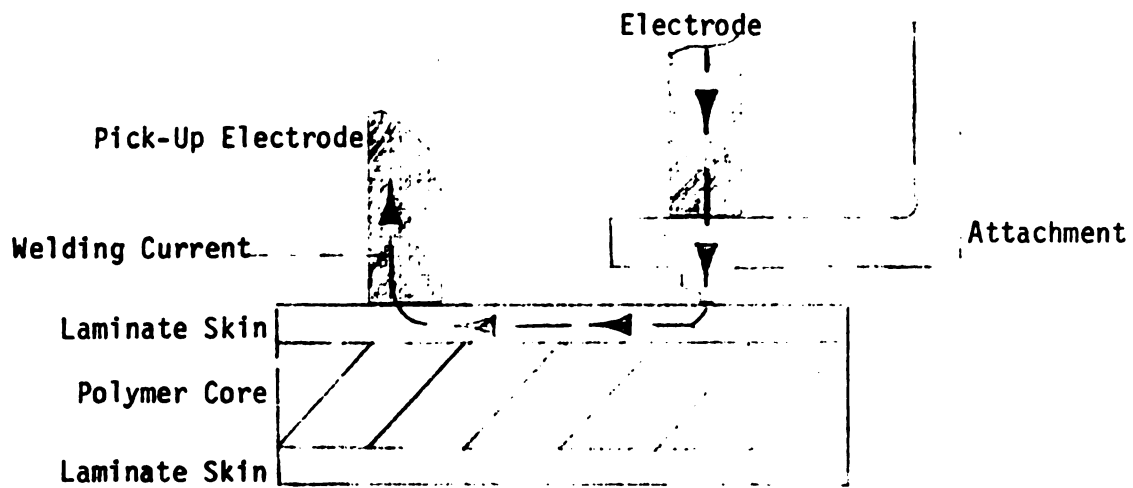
MAKING SUBSEQUENT WELDS
